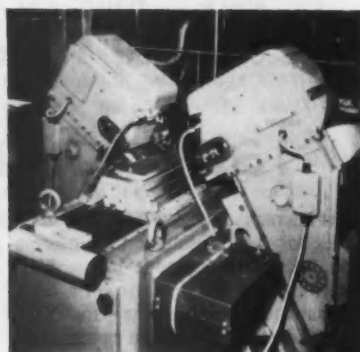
Double-headed tape-controlled Koepfer rack-cutting machine—tape unit in foreground
